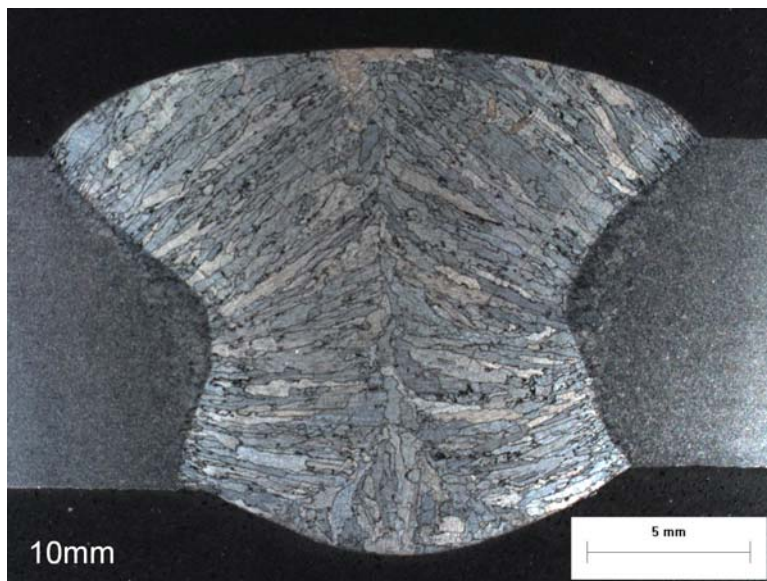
Modified S-SAW Weld 10-mm Plate
